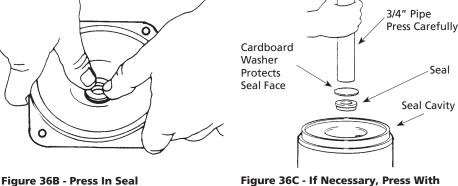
C - If Necessary, Press With Cardboard And Pipe
